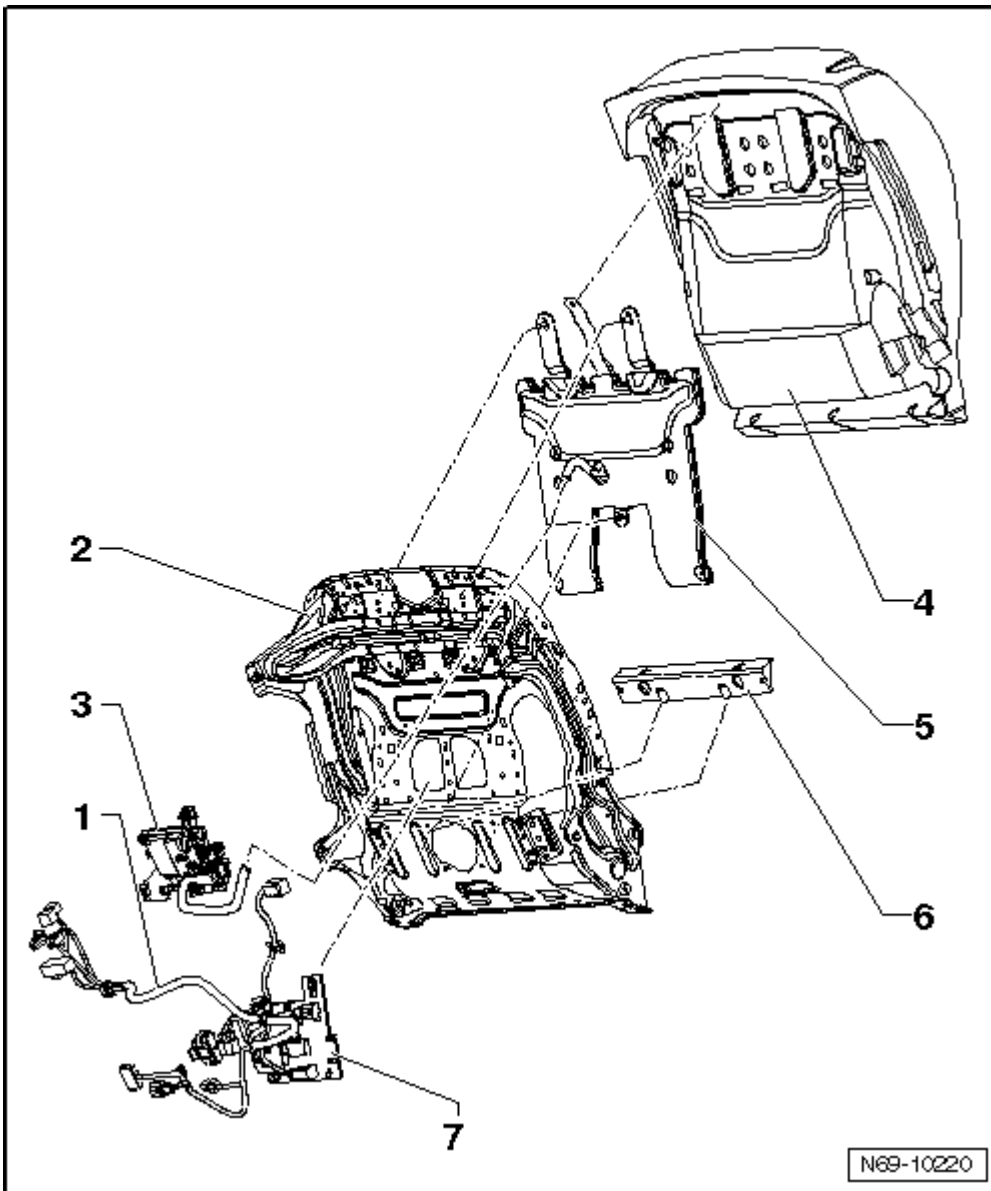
Identifying Assembly Overview: Passenger Occupant Detection System (PODS), (USA Only)
